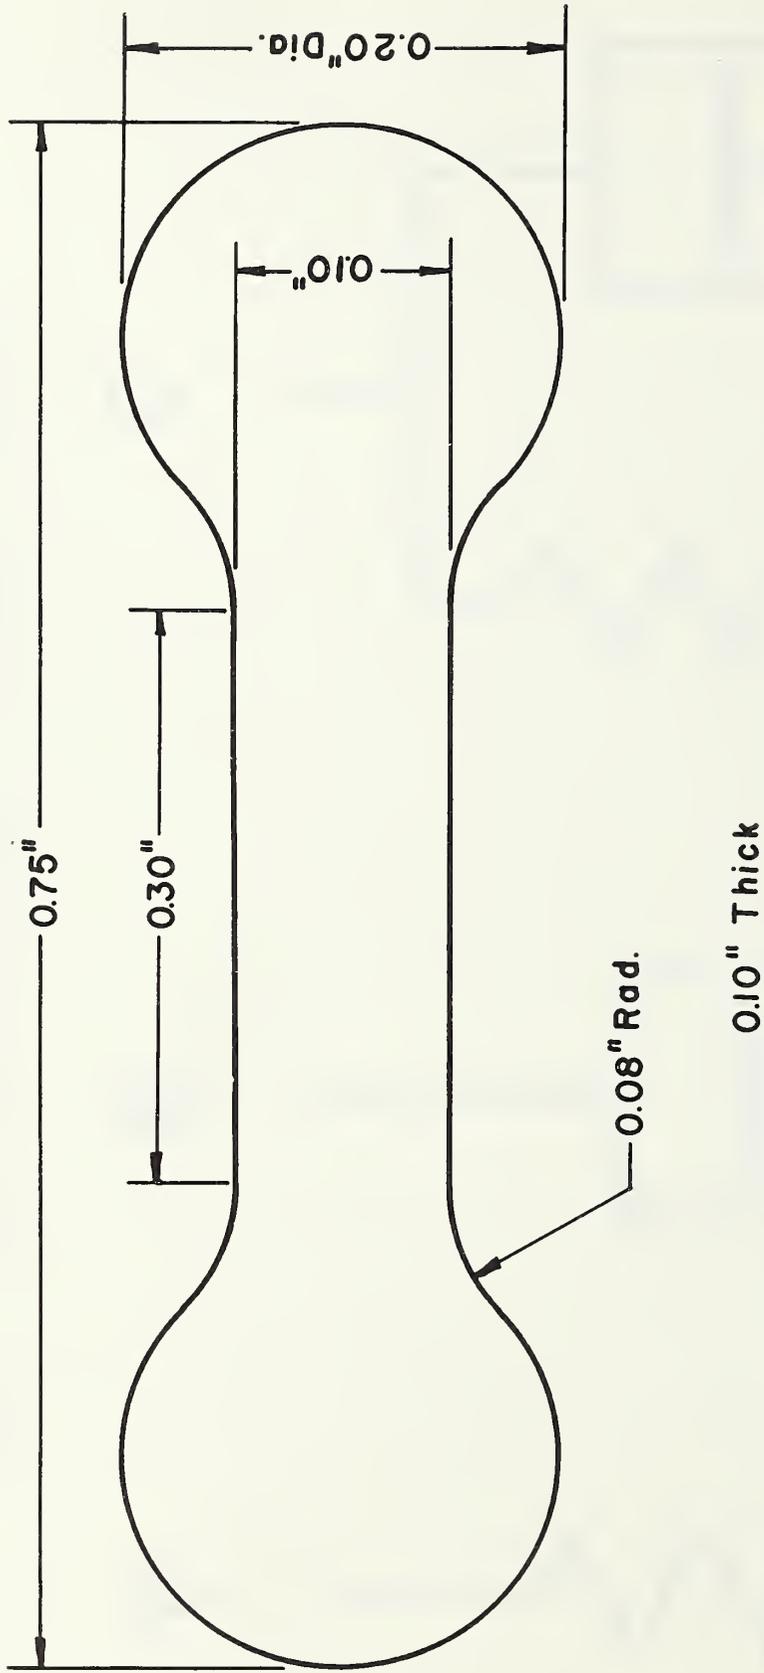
Dimensions of the dumbbell-shaped tensile specimen of amalgam.
